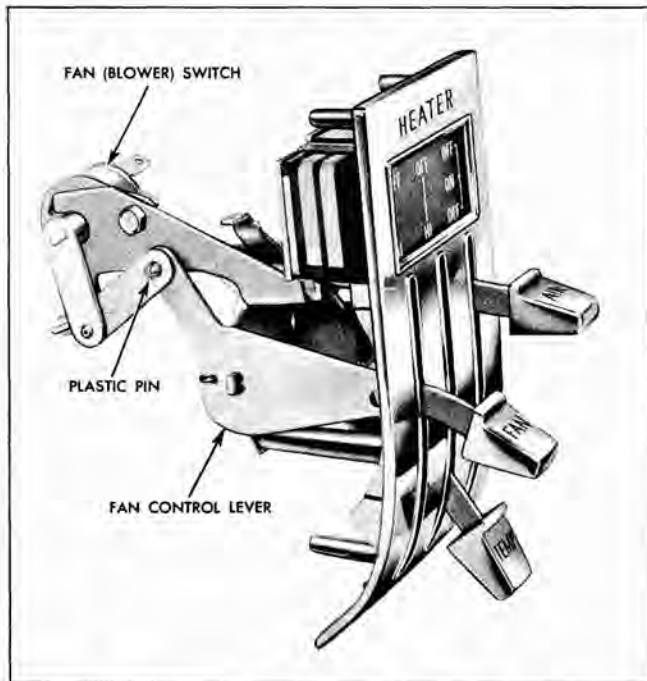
A-23 Tempest Control Panel Fan (Blower) Linkage
